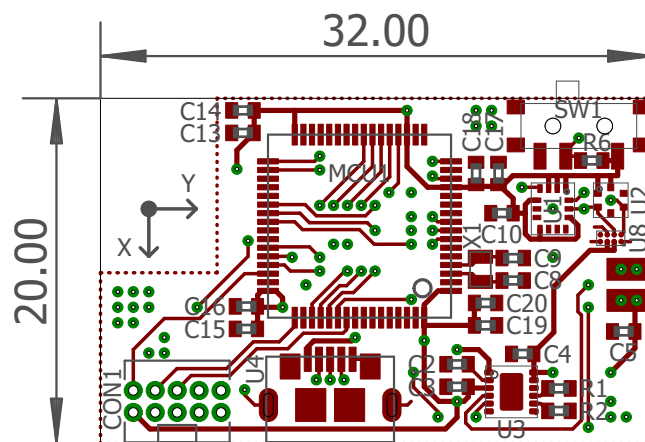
Top view of the Winter layout (units in millimeters).
